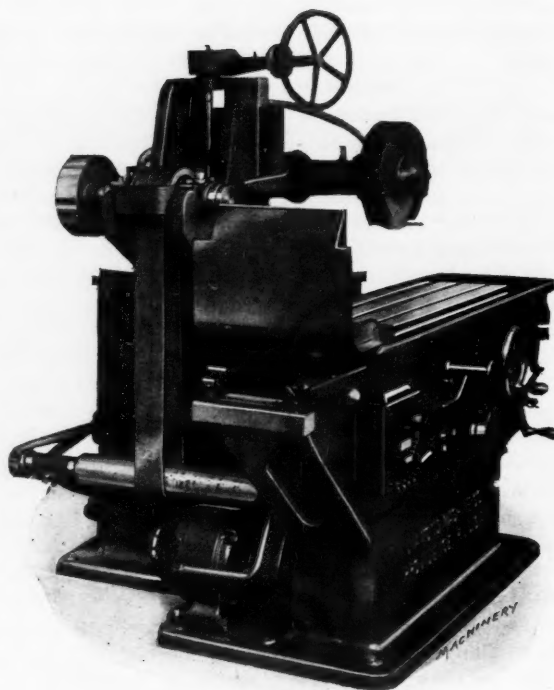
Opposite Side of Machine shown in Fig. 1 transmits power through an idler gear and bronze pinion to a gear on the feed pulley shaft.
